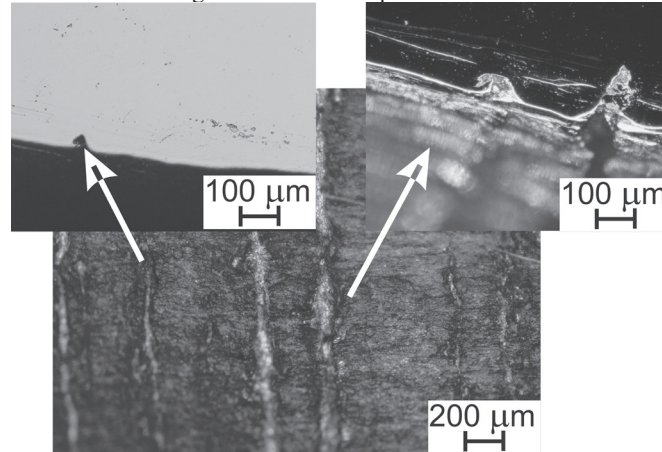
Macroscopic and microscopic views of fractures and cracks on the 2.0 d-initial length 20MnB4 steel specimen – relative strain 75 %
